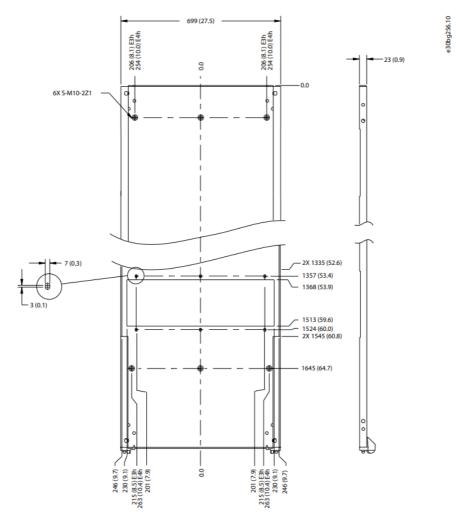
Vent Dimensions for Mounting Plate in 800 mm (32 in) Cabinet
